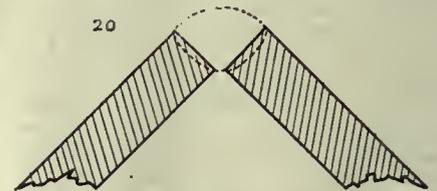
CORNER WELD MADE BY ADDITION OF WELDING ROD.
